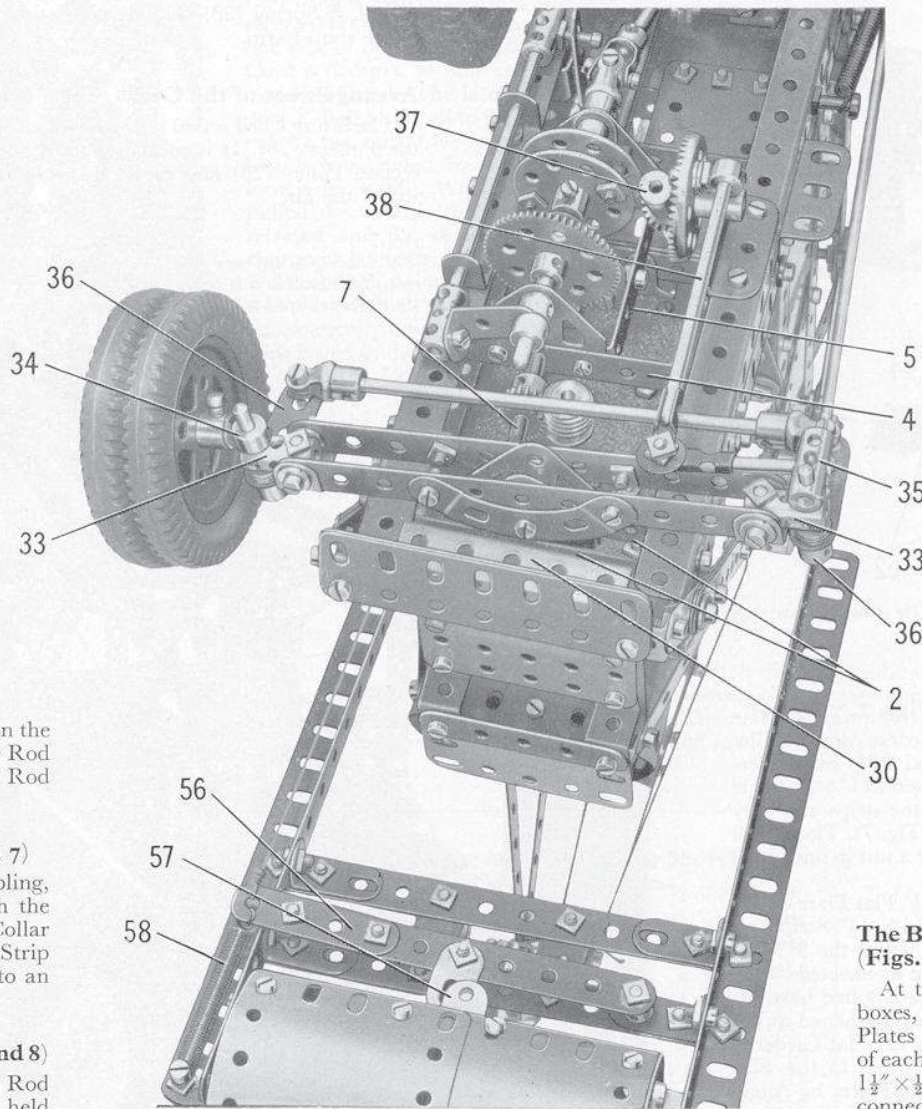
A front and end view showing the pivoted front axle beam and details of the steering mechanism
